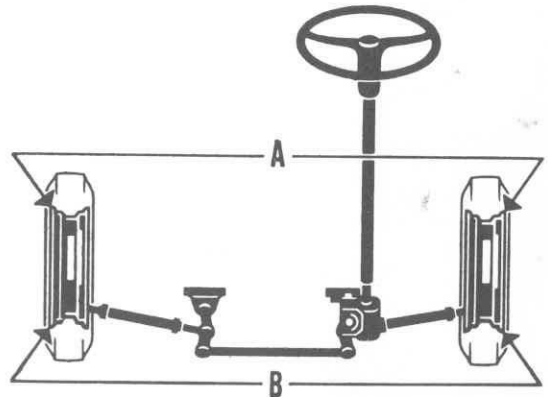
9 Measurements to be taken when checking wheel tracking for toe-in, where the difference between A and B gives the required figure
